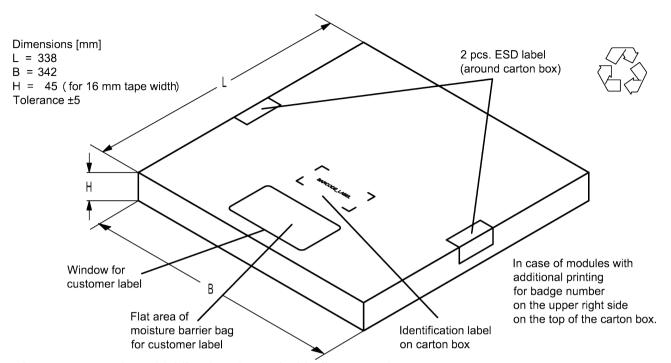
Drawing of folding box for reel with diameter of 330 mm.
